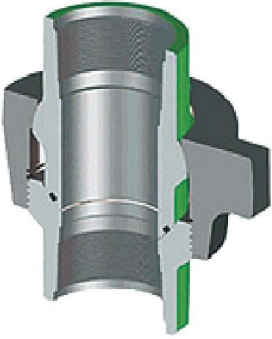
(Mis-aligning Union) has NPT or Butt Weld Ends. It is constructed of Forged Alloy Steel, and comes with a Buna N O-Ring. Recommended for high pressure water, oil, mud or gas service where alignment of piping is a problem, with up to 7 1/2° angular adjustment from center (15° total).
